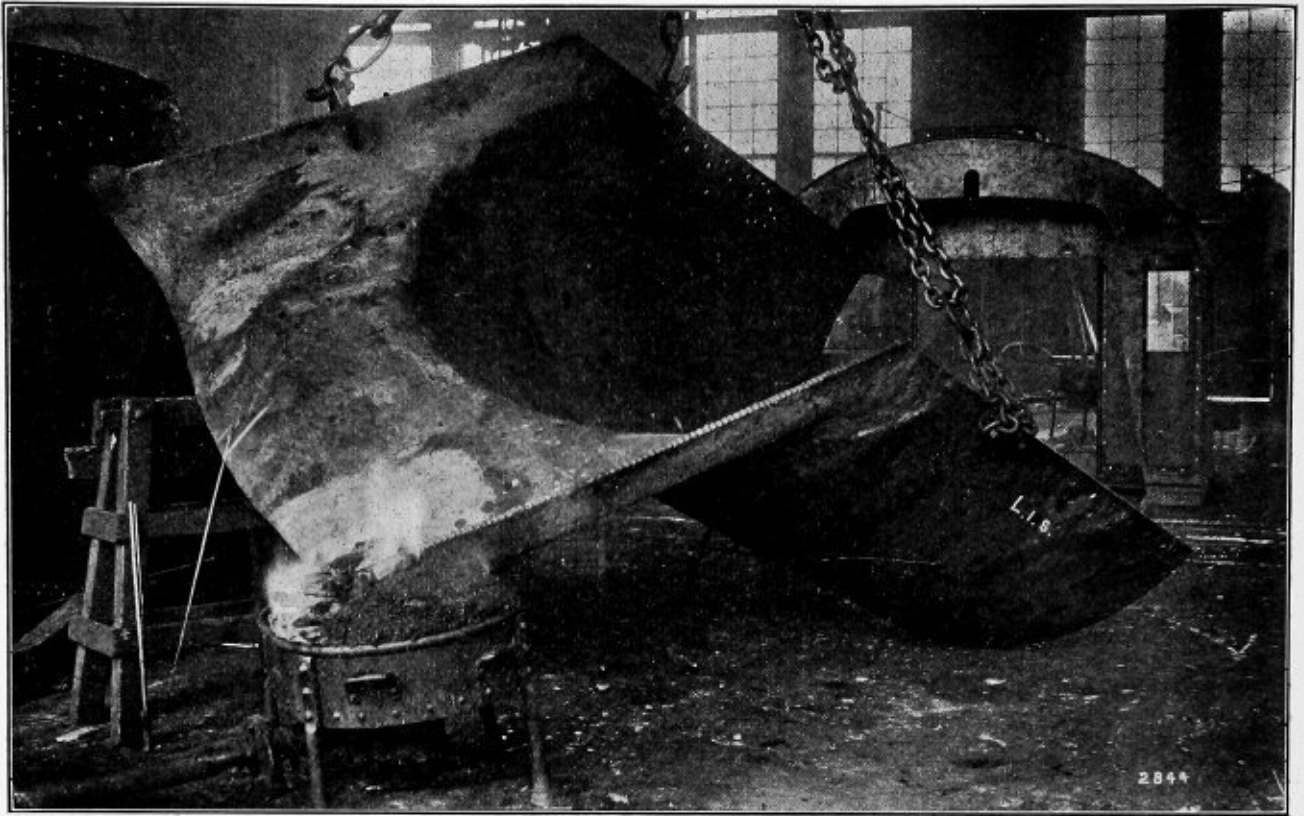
Lower Half of Dome Course Flanged Integral with Throat Sheet
